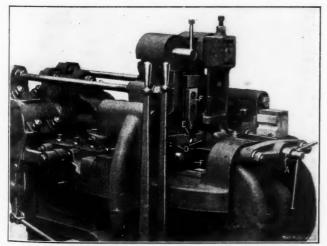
View of Hammer Header showing Both Gripping Dies removed, and One Die Hanger
